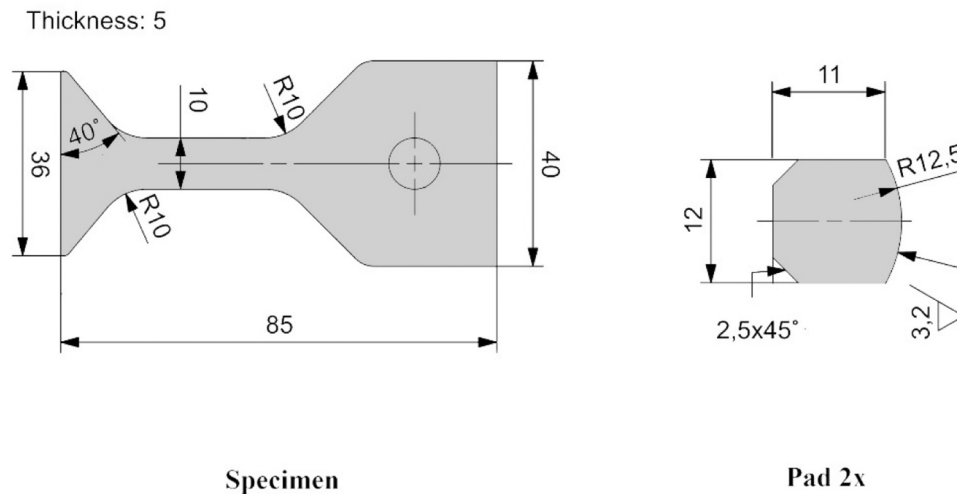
The geometric dimensions for the dovetail joint with pads [9].
